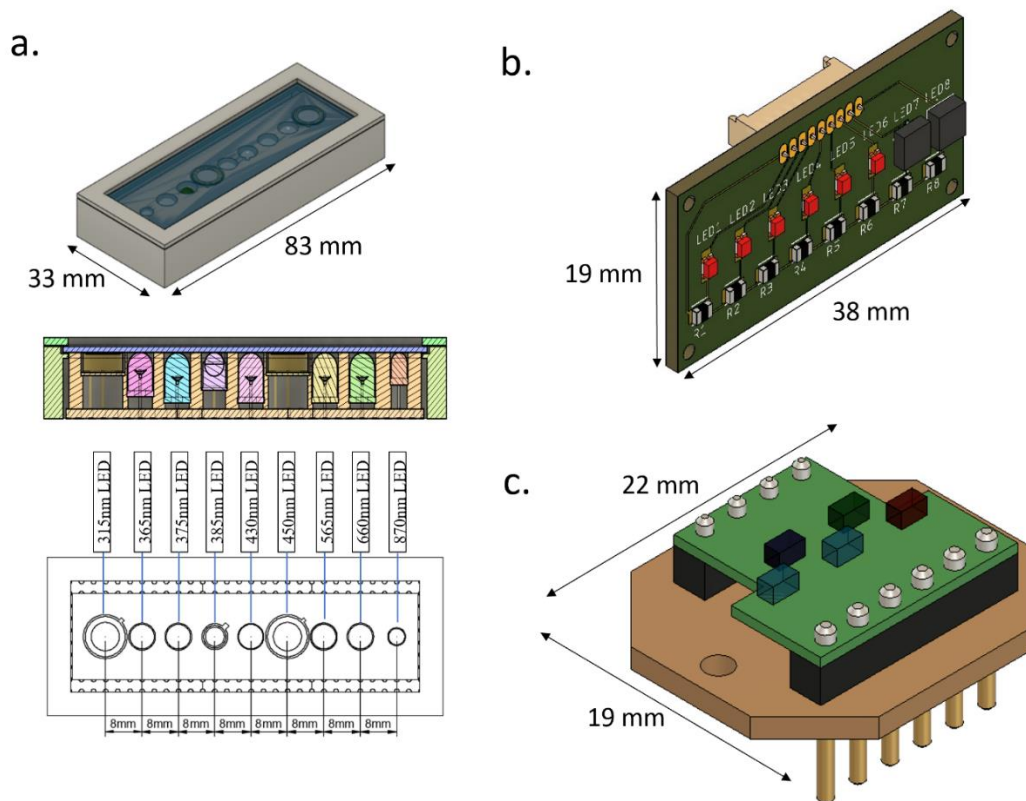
Iterative designs for multi-LED array light source. (a) Linear array design using through hole LED packages with a board size of 83 mm x 33 mm (b) Circuit board linear array design using surface mounted LED packages with a board size of 38 mm x 19 mm (c) Compact array using surface mounted LED packages with a board size of 22 mm x 19 mm.
